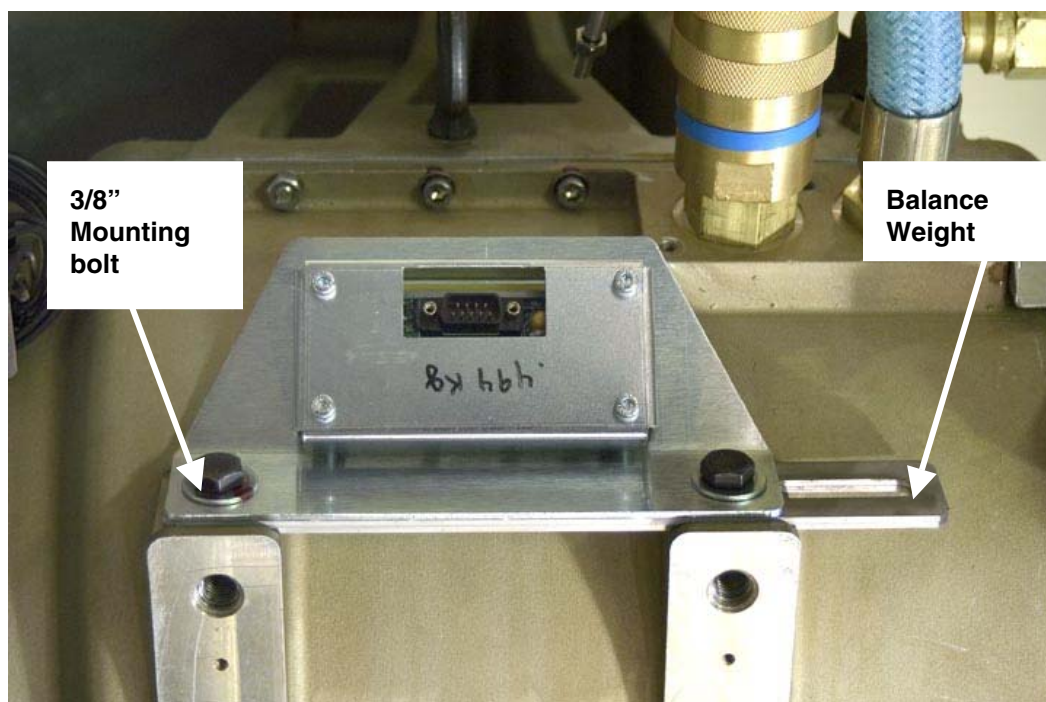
Mock drawing of Smart ID installation points on Performix Pro tube
